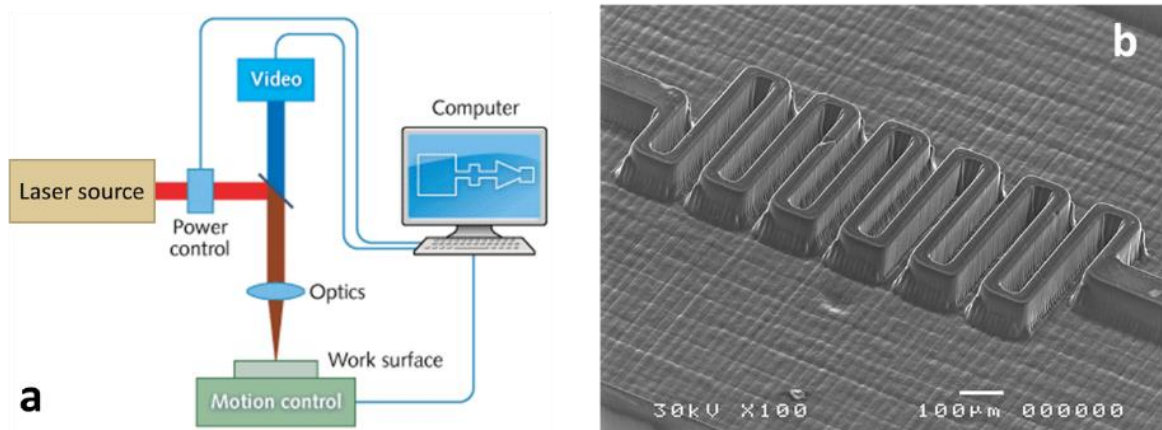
(a) Schematic diagram of laser micro-machining system [3]. (b) serpentine spring pattern laser micro-machined on diamond [4].
